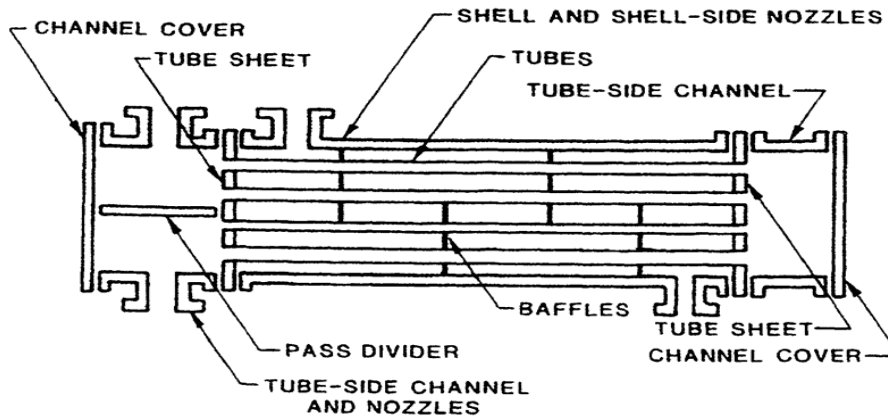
Fixed tube type shell and tube heat exchanger [14]
